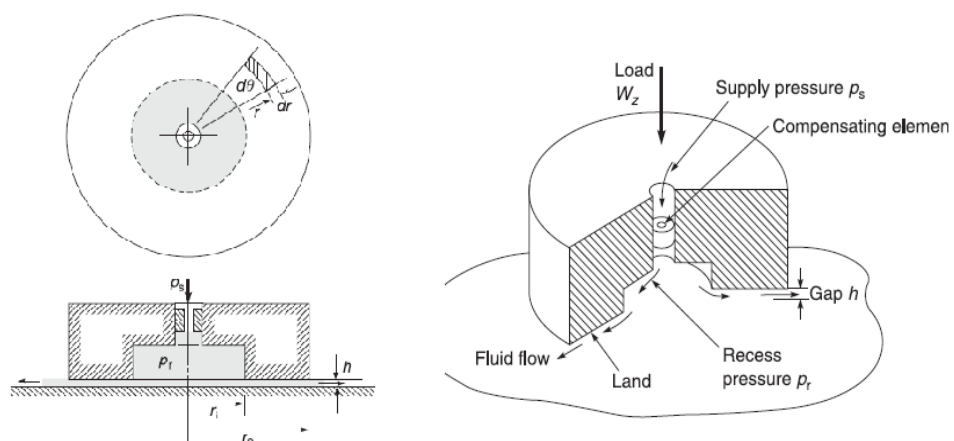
hydrostatic thrust bearing geometry (Williams 2005, 206)
